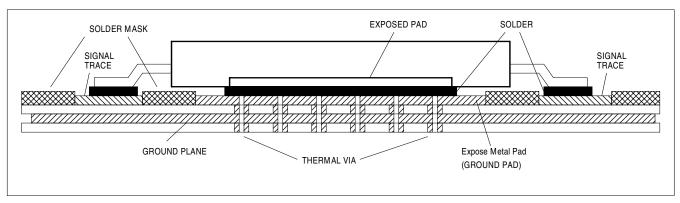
P.C. BOARD FOR EXPOSED PAD THERMAL RELEASE PATH EXAMPLE
